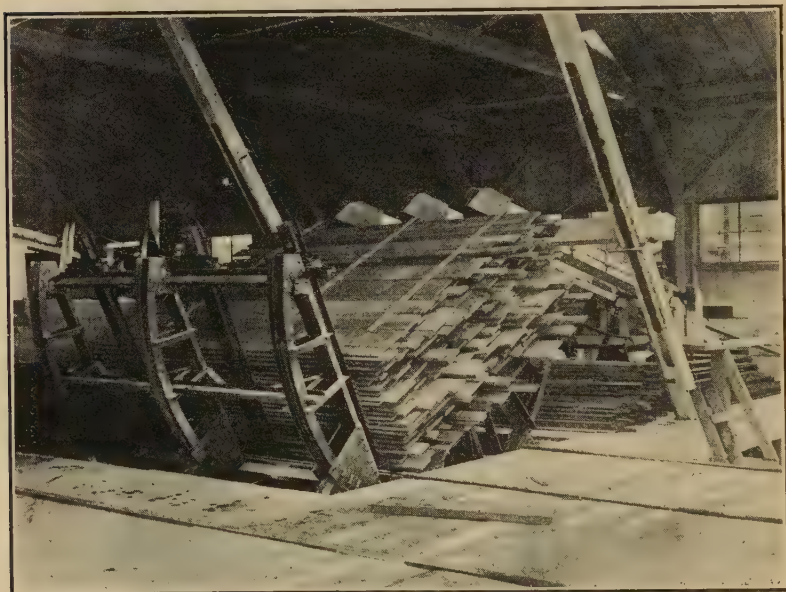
Method of piling lumber with vertical stacker. (Courtesy, *Standard Dry Kiln Co.*)
